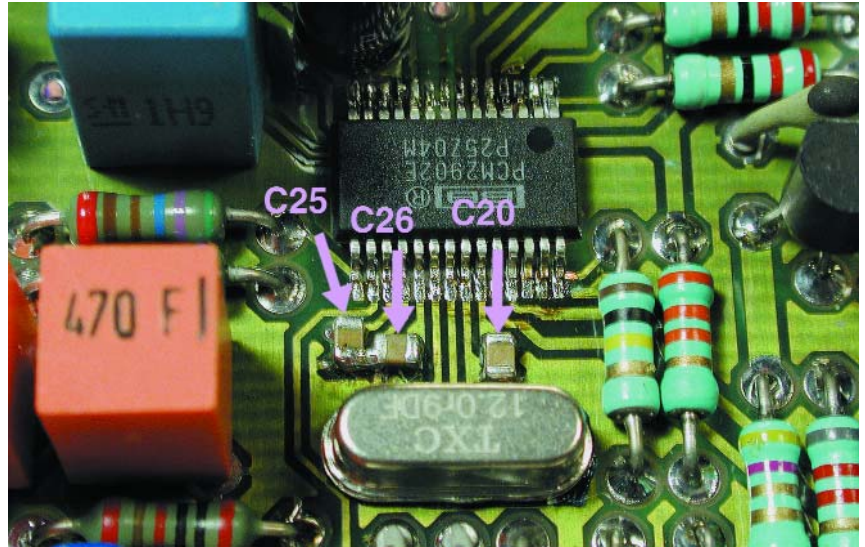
Mounting IC1, C20, C25 and 26 requires precision in soldering.
